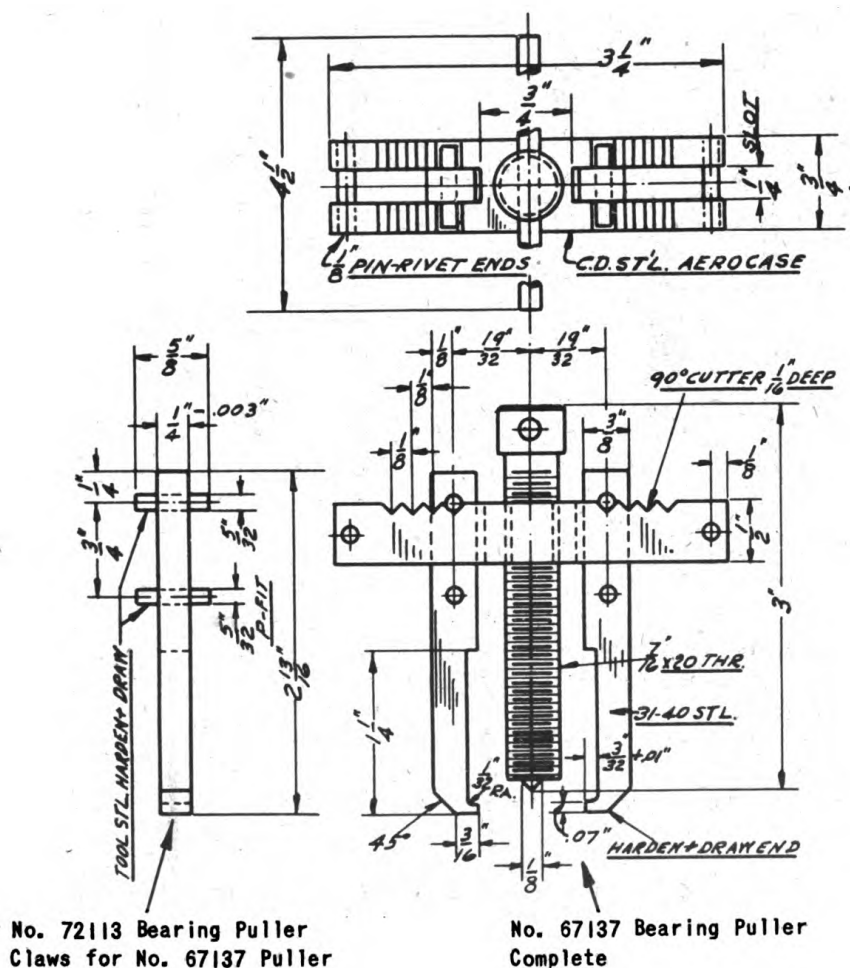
is a detail drawing of No. 67137 Bearing Puller.
